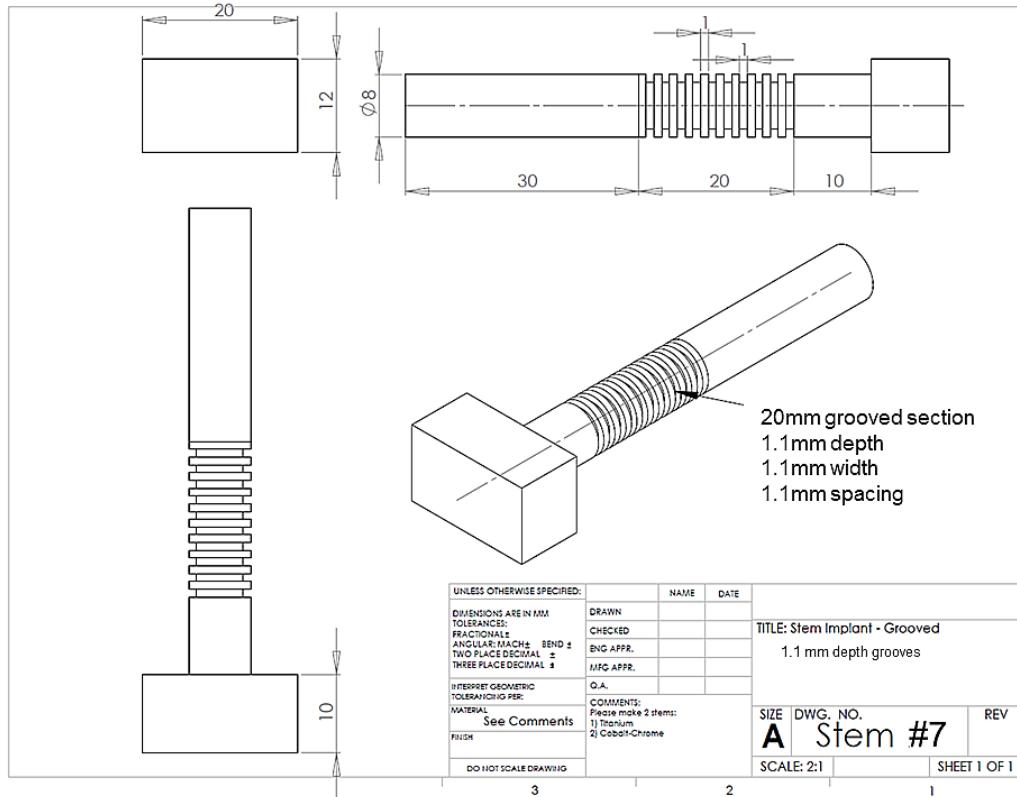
Engineering Drawing of 1.1 mm Grooved Implant Stem
